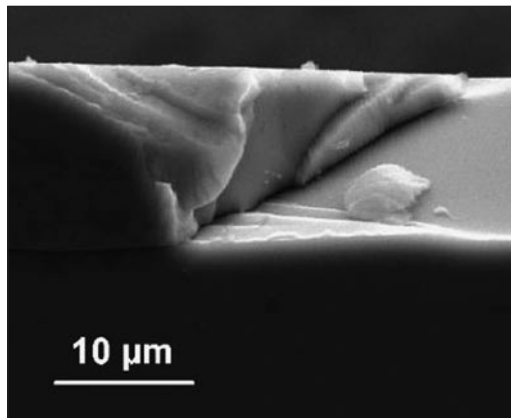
Example of initial cracks occurring after wafer dicing at die edges
